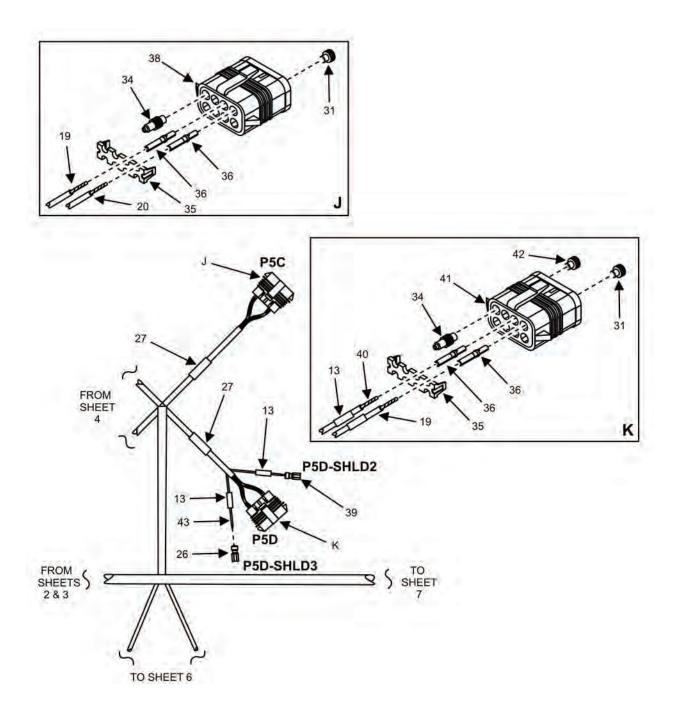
Engine Wiring Harness (Sheet 5 of 15).
